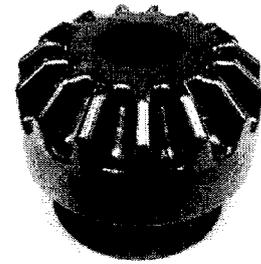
Trial gear 3, machined by Roders-RFM600 under the machining condition 2
